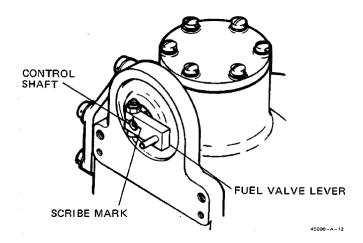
Scribe Mark Location for Alignment during Reassembly
